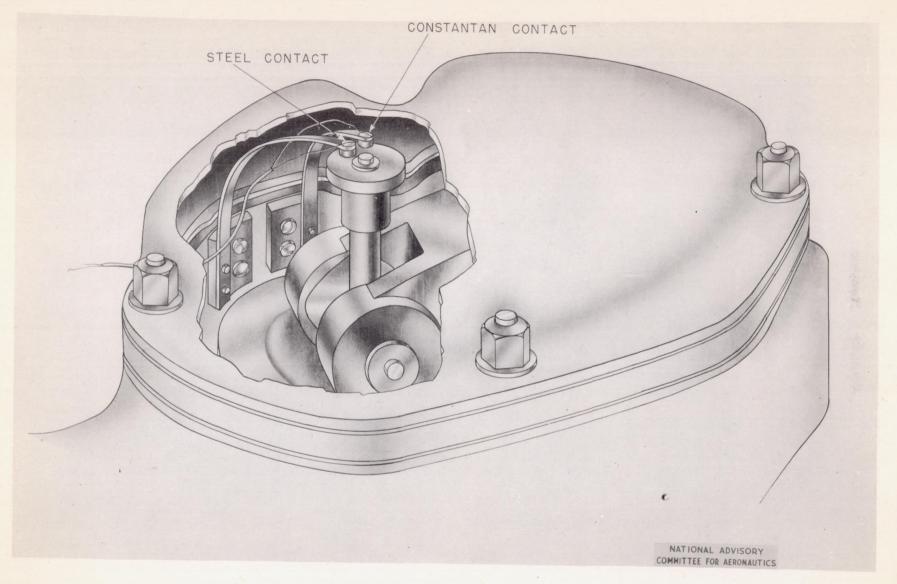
General arrangement of exhaust-valve thermocouple contacts inside rocker-box of engine cylinder.
